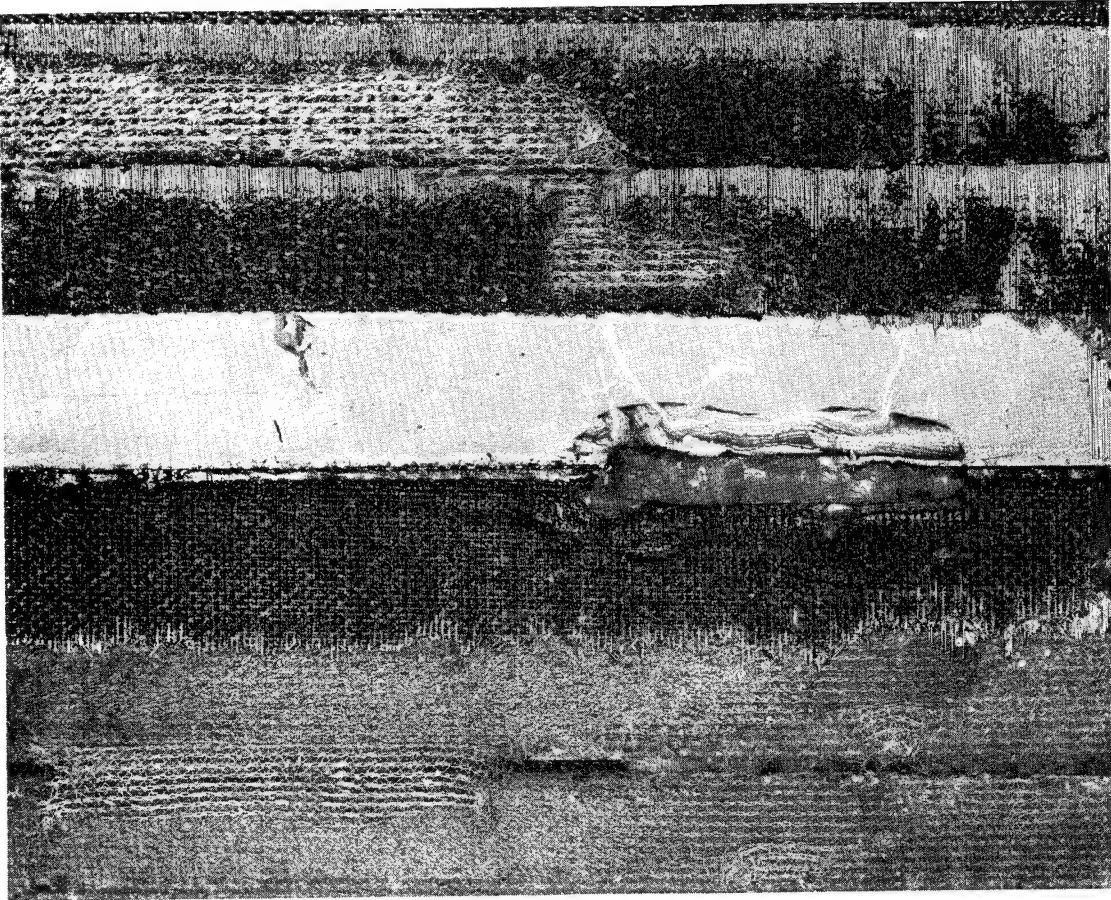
Specimen IIB31A05 - Overall View - 2X Magnification
